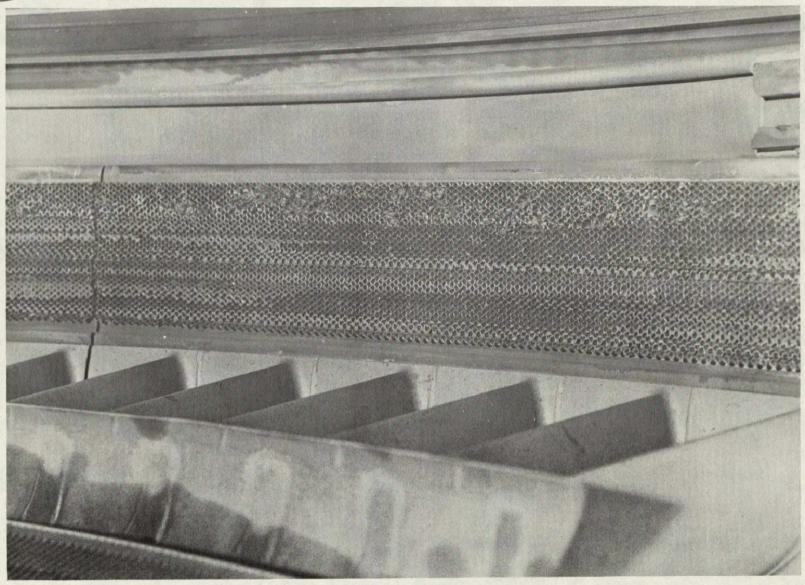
LP Turbine Stator Assembly, Stage 1 Shroud Rub Pattern.
